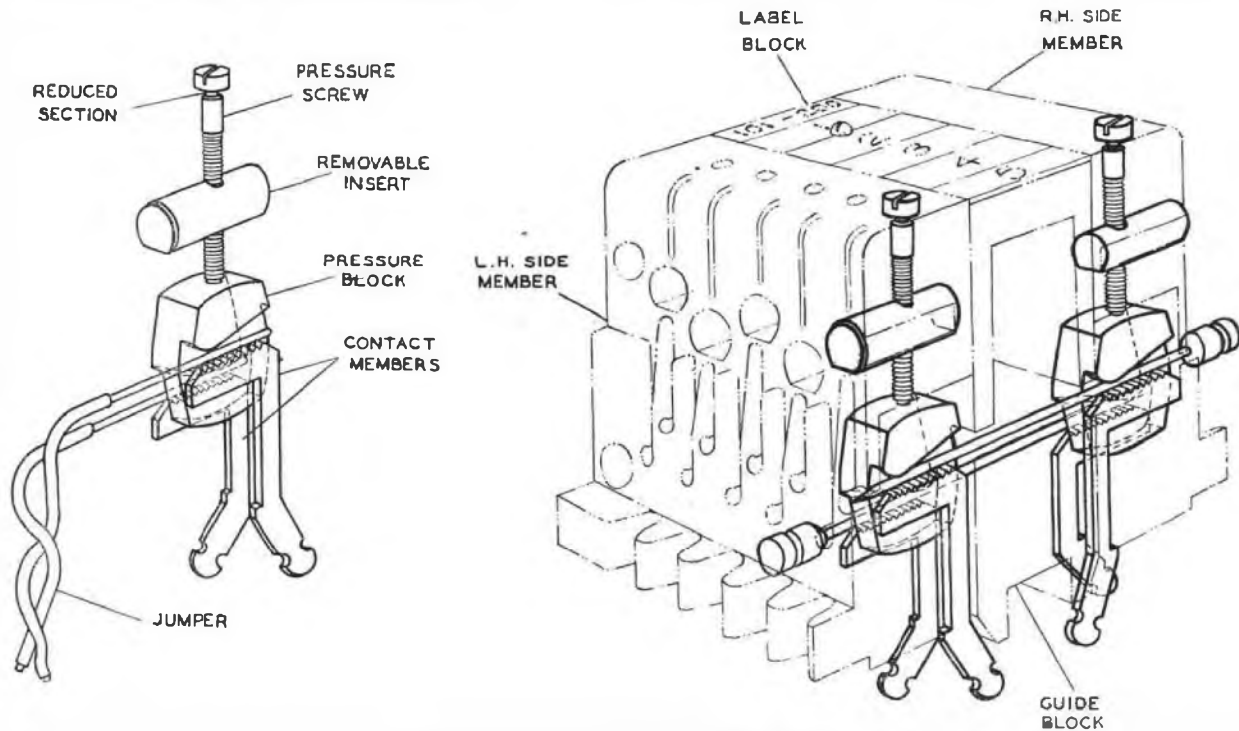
DETAILS OF ENCLOSED TYPE STRIP.
